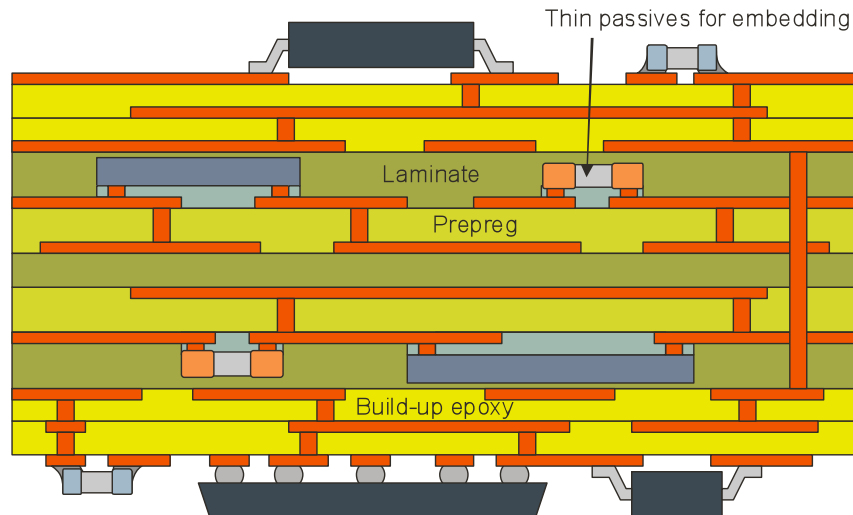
Graphical representation of a PCB with two EPC cores and components assembled on the outer layers [5].
